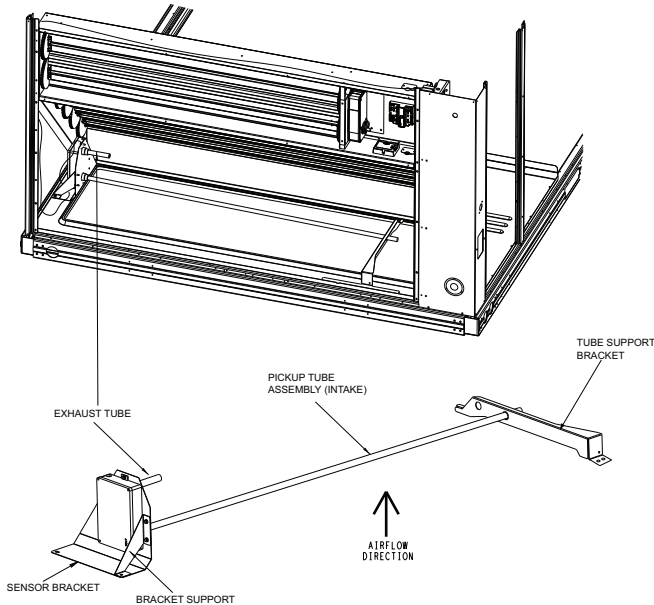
Vertical Return Air Sampling Sensor Assembly and Tube Location
